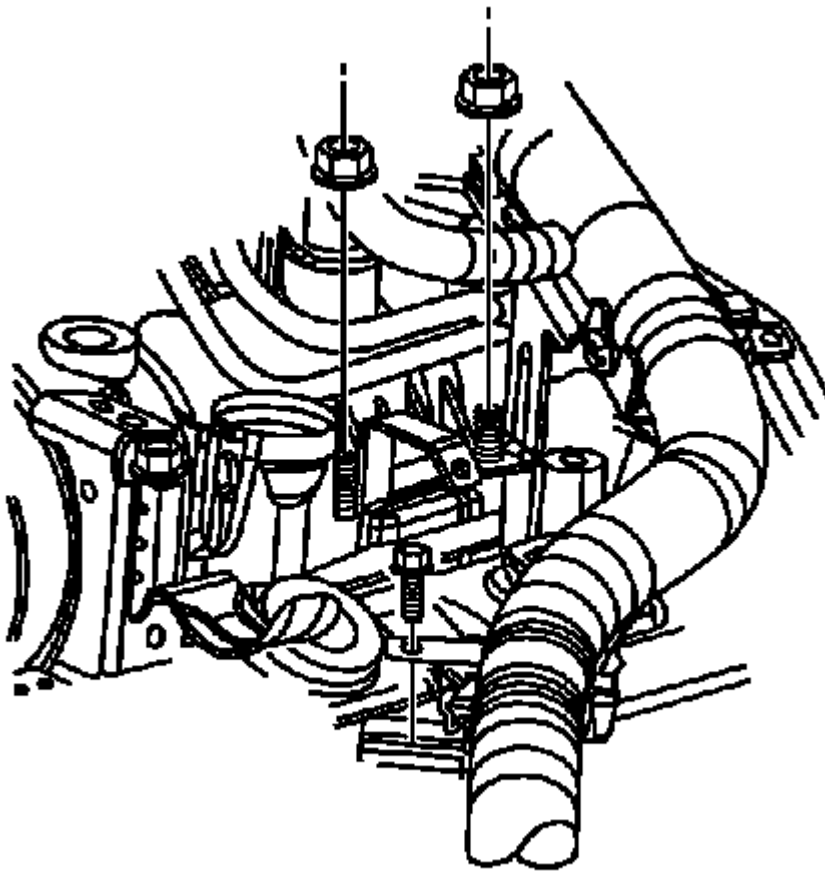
View Of Engine Wiring Harness Bracket & Nuts
